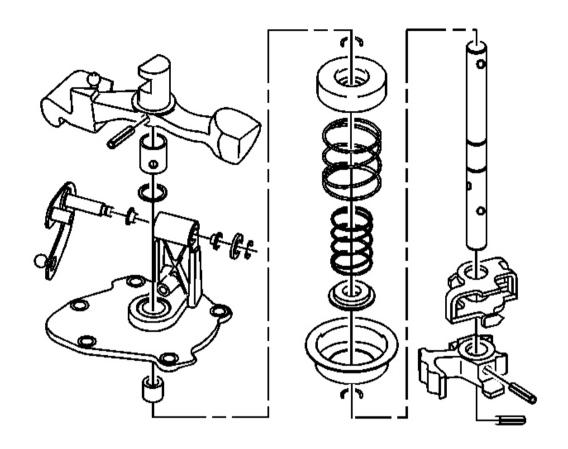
Exploded View Of Shifter Assembly Courtesy of GENERAL MOTORS CORP.
